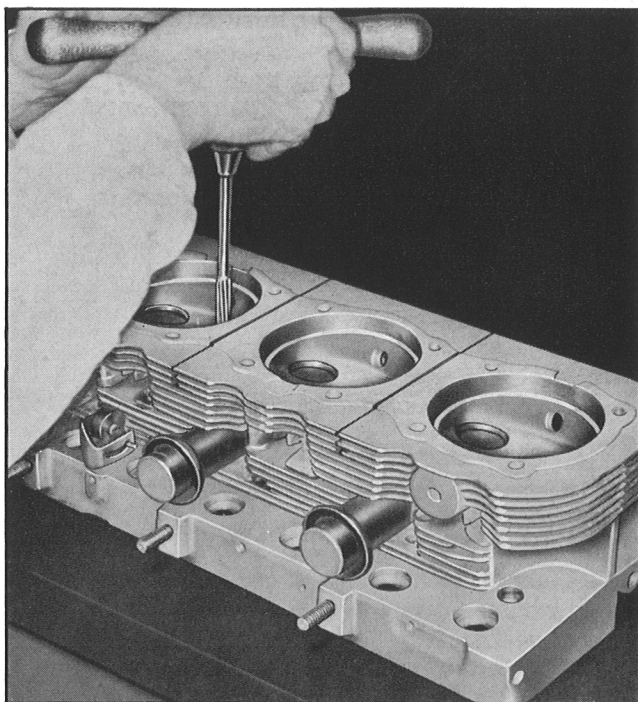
Reaming Cylinder Head Valve Guide Bore
